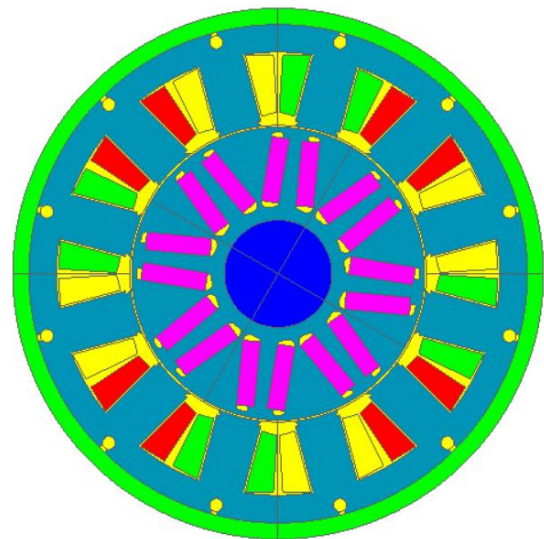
Sketch of the stator and rotor core of the designed PMSM.
